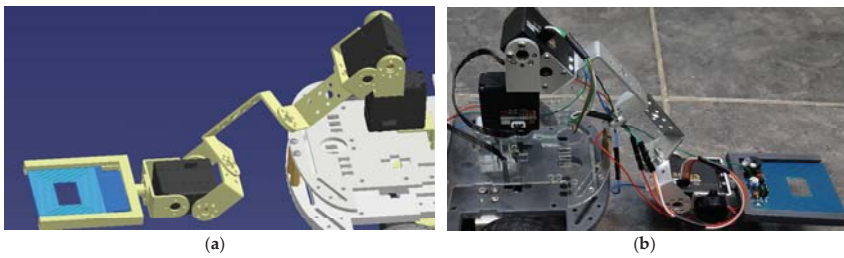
Virtual development of the end part of the robotic arm sensor holder with Computer Aided Design (CAD): (a) 2D drawing of the sensor holder; (b) representation of a 3D model designed as a mine detection sensor holder.
